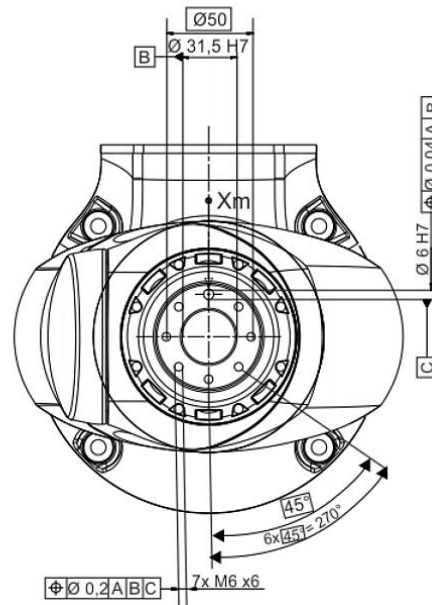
Hole positioning in cobot flange (KUKA, 2016)
